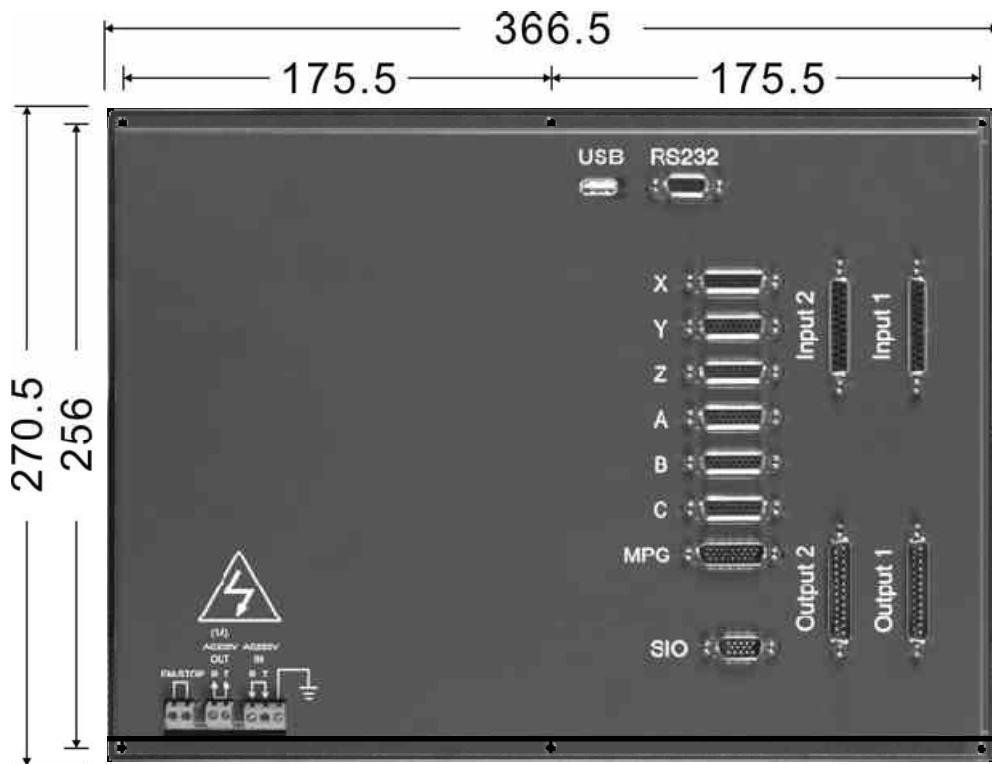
H4D-M Cabinet Dimensions and Rear View port
